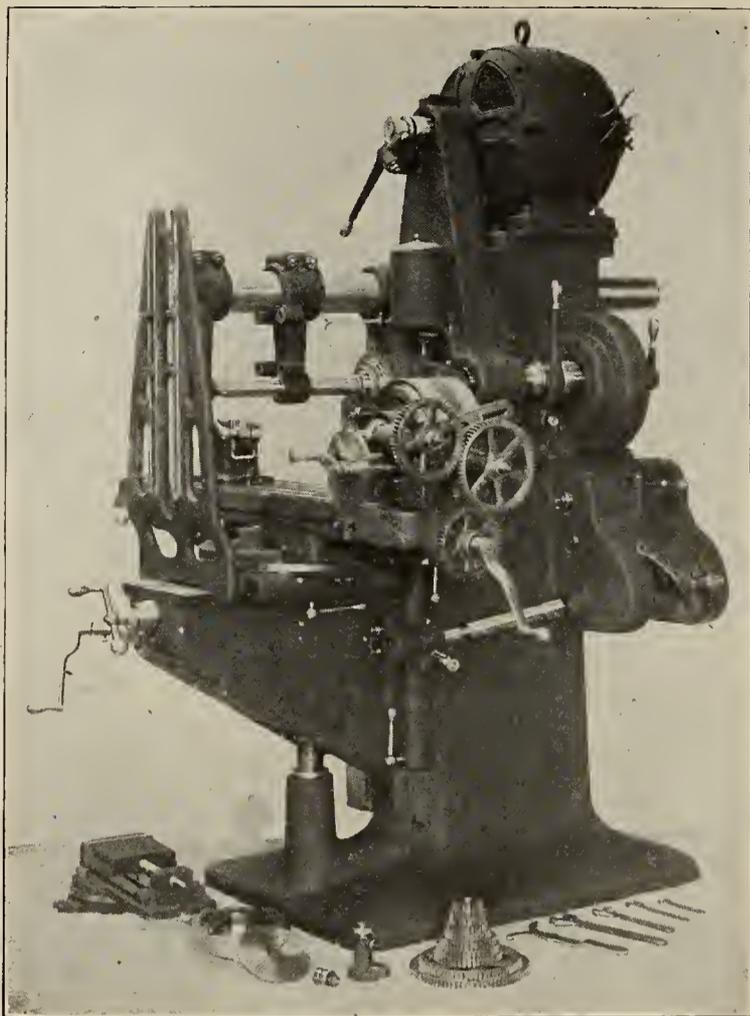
MILLING MACHINE WITH VARIABLE SPEED DRIVE.
